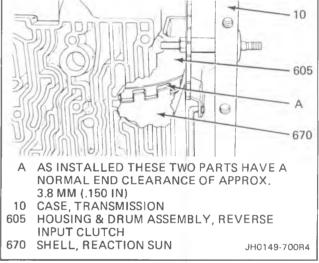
Clearance Between Reverse Input Clutch and the Sun Gear Shell
